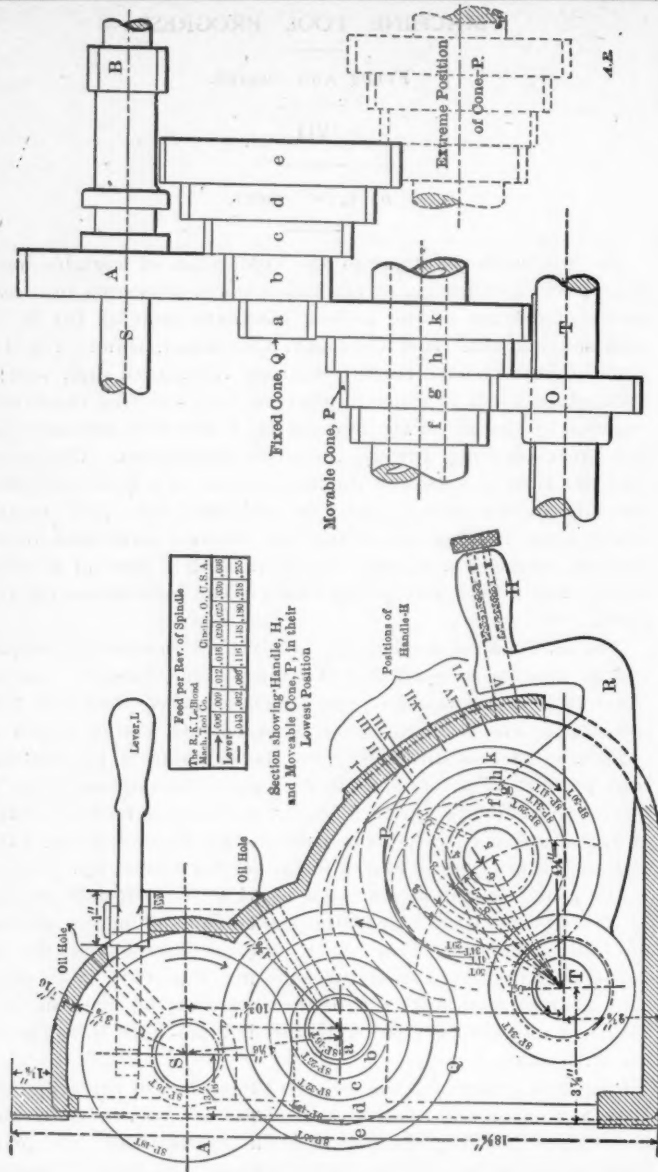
CROSS SECTION OF GEAR BOX, SHOWING ARRANGEMENT OF GEAR CONES.
